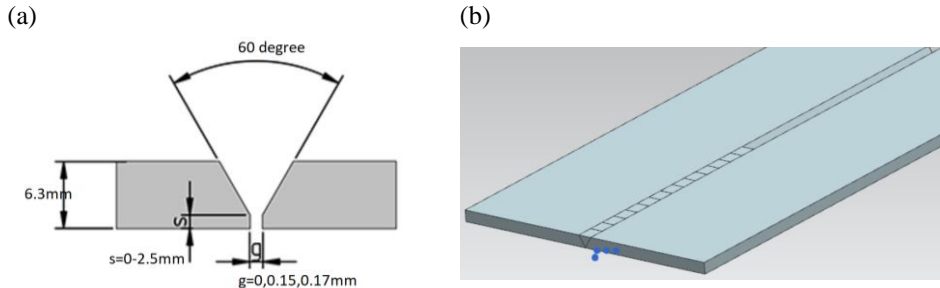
(a) Geometry of joint preparation (b) Geometry of the weld sample
